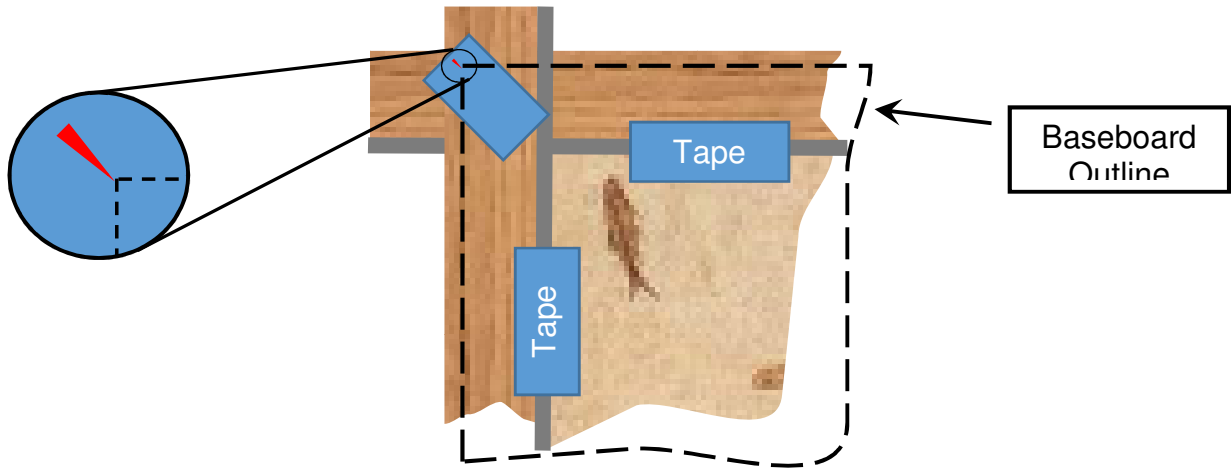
Workpiece Turned Over to Aid Corner Cutting
